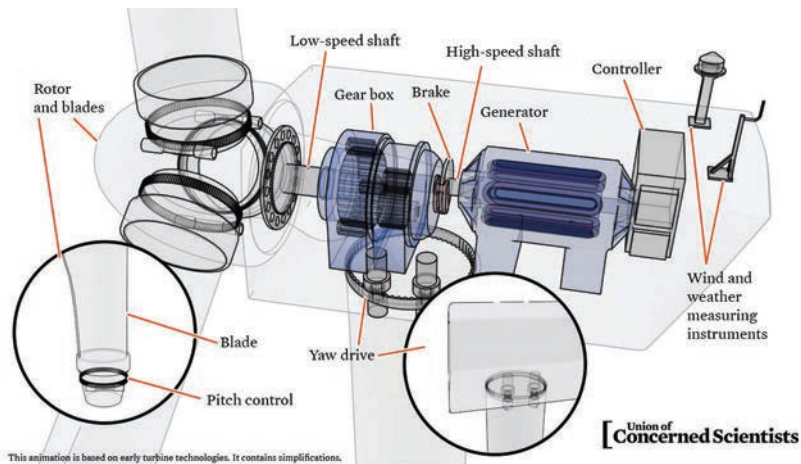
Simplified view of components of an upwind-facing, horizontal-axis wind turbine with a gearbox drive. [15] (Courtesy: Union of Concerned Scientists, www.ucsusa.org.)
